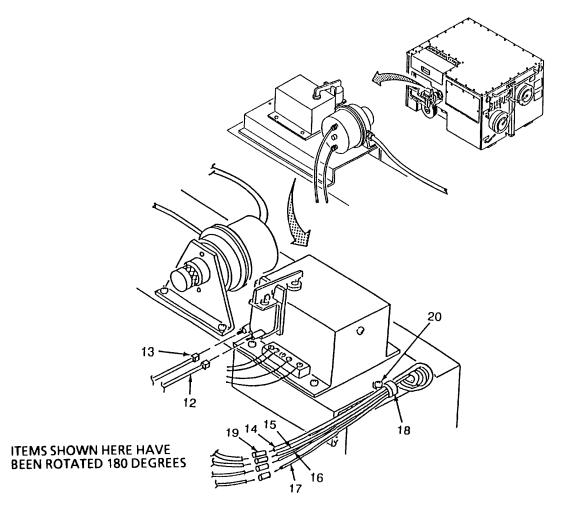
Combustor Control Relay Installation (Sheet 2 of 2)
